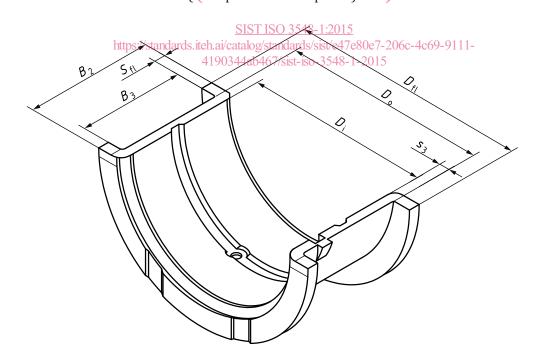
Flange half bearing (integral or assembled, excluding free spread)
